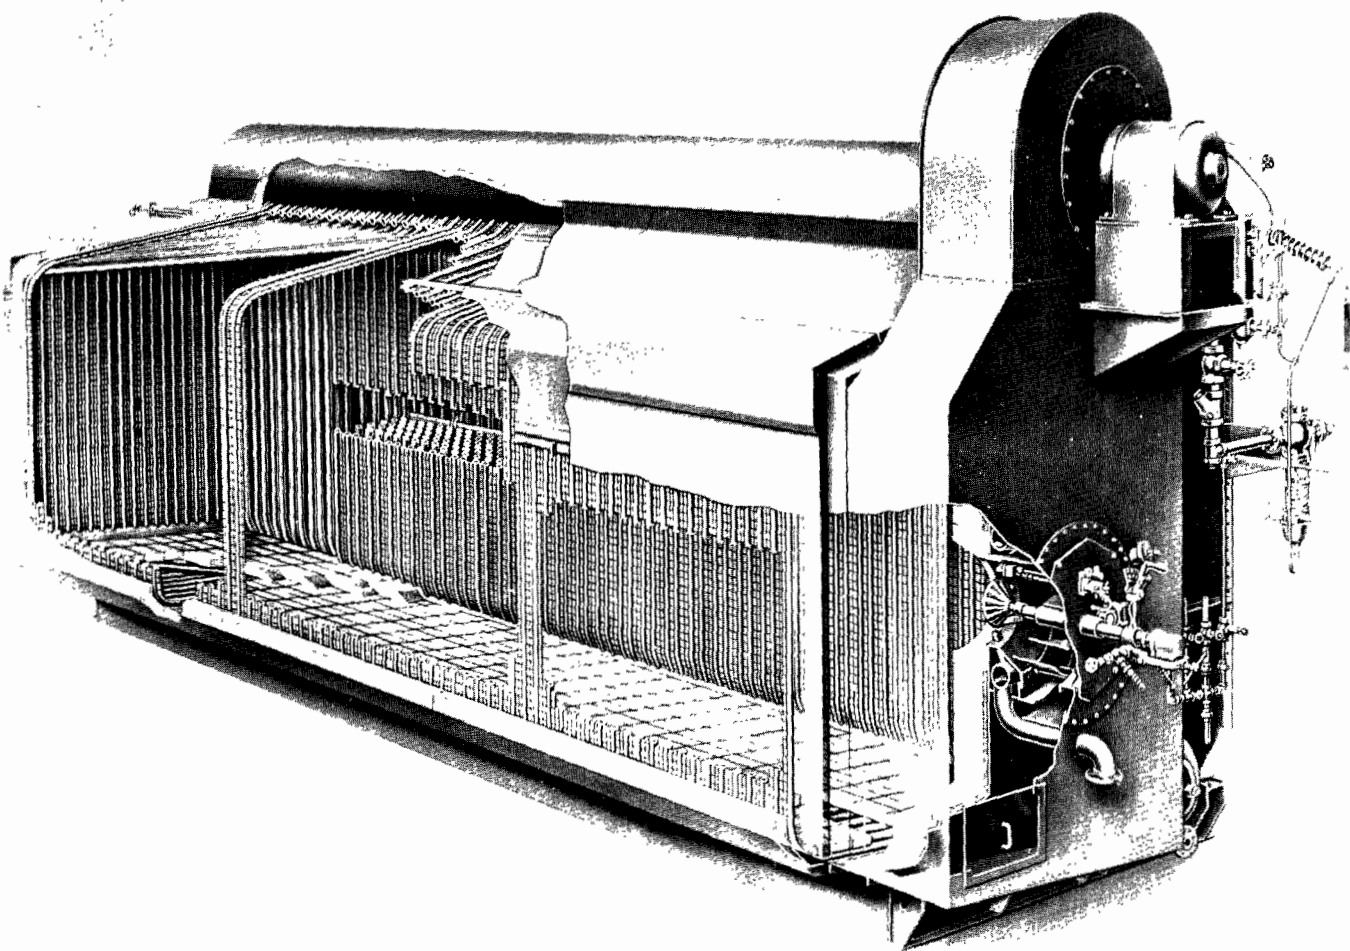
An industrial water tube boiler (The Babcock and Wilcox Co., New York).
